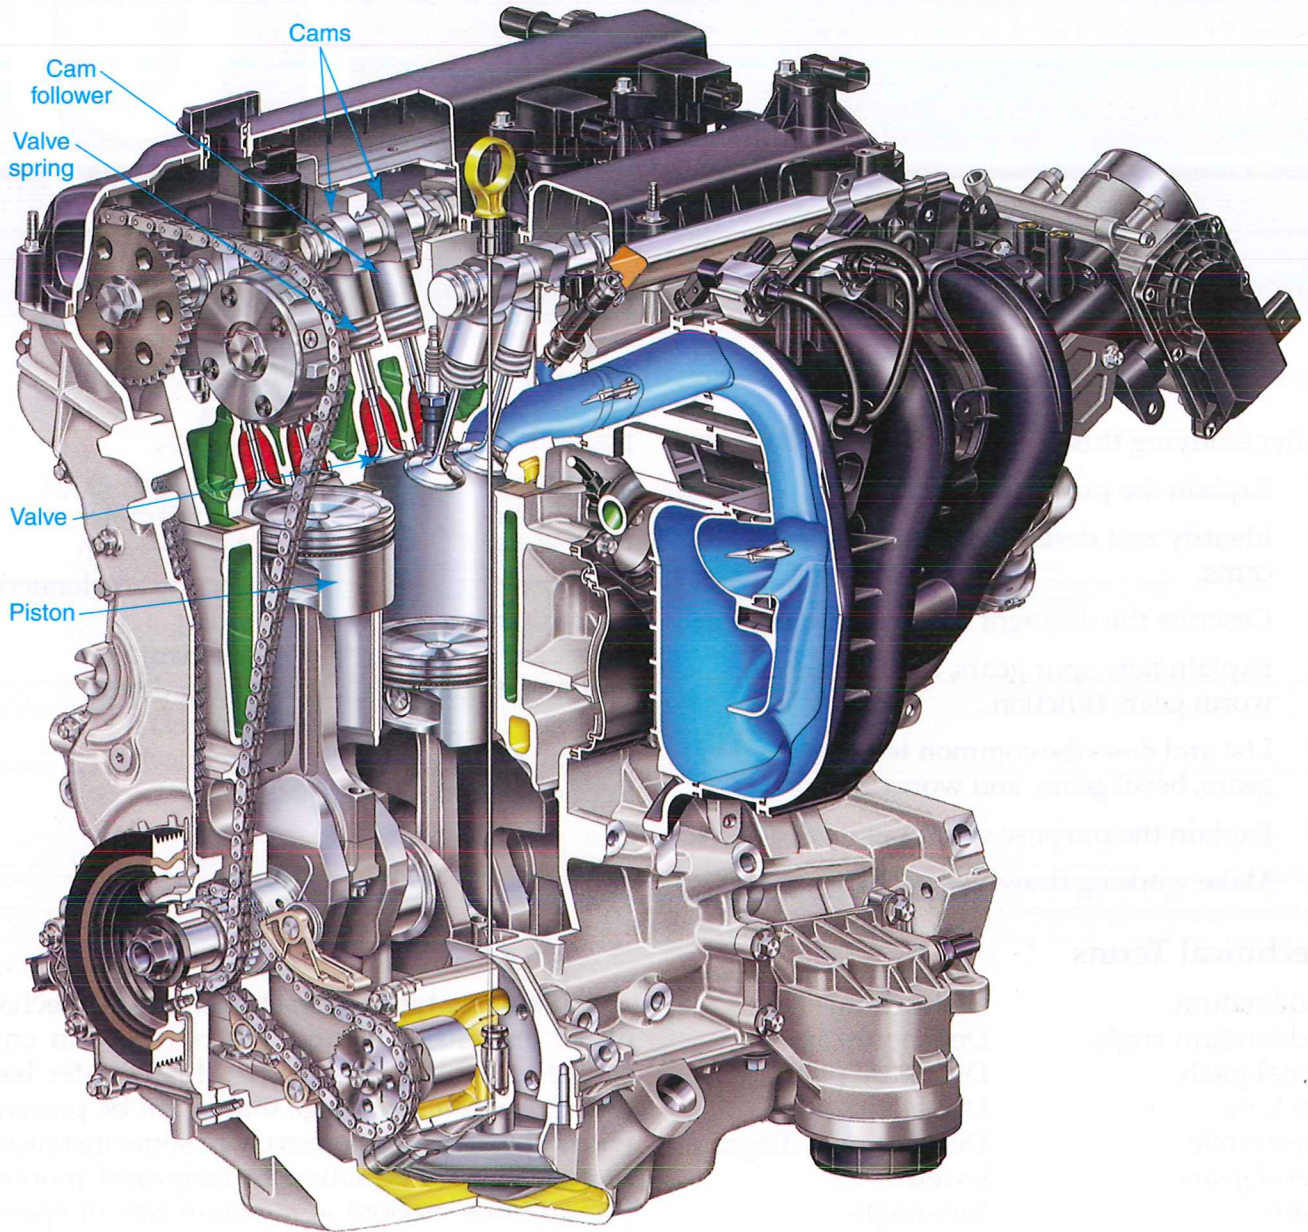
Cams are used to maintain the precise relationship between valves and pistons to produce the intake, compression, power, and exhaust strokes of an internal combustion engine. Shown is a four-cylinder, dual overhead cam engine. (Ford)
